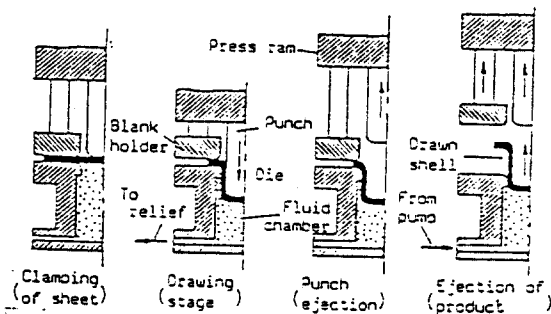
Schematic procedure for counter-pressure deep drawing using a specially designed machine.
